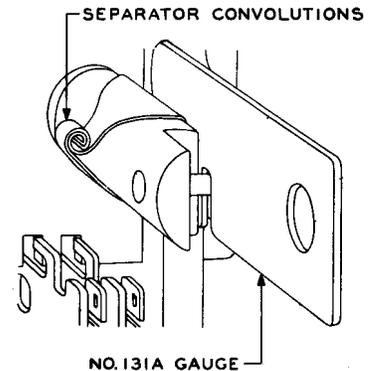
D-167911 Separator Convolution After Removal of D-167912 Separator Adjuster
